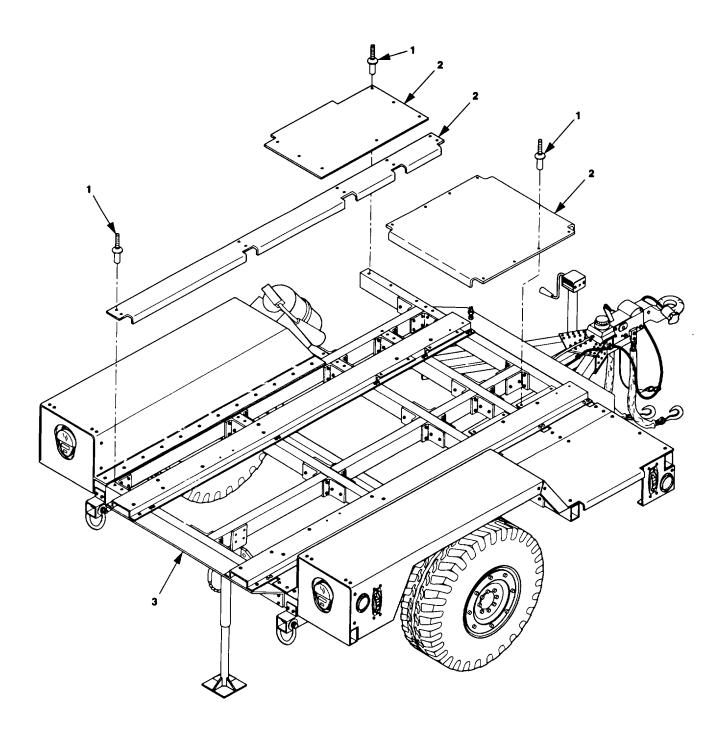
PU-798A and PU-799A Floor Replacement.
